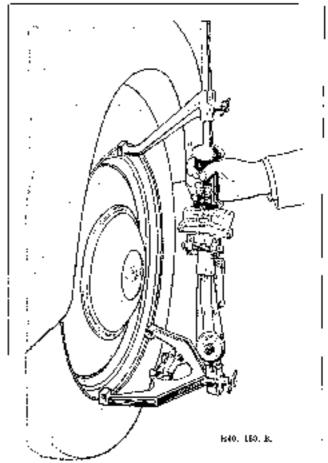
Checking the wheel camber angle with the Dunlop Wheel Camber, Custon and Swivel Pin Gauge.
